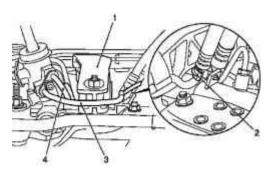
Removing the front suspension subframe: 1 - bracket damping engine block, 2 - holder, 3 - supply pipeline, 4 - reusable tube
